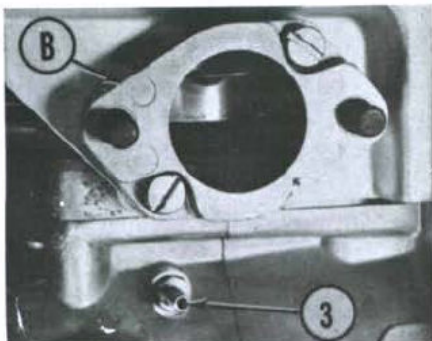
Carburetor adapter flange (B) is type not equipped with internal pulse passage. Fitting (3) in external passage port operates fuel pump. Refer also to Figs. 1 and 3.
